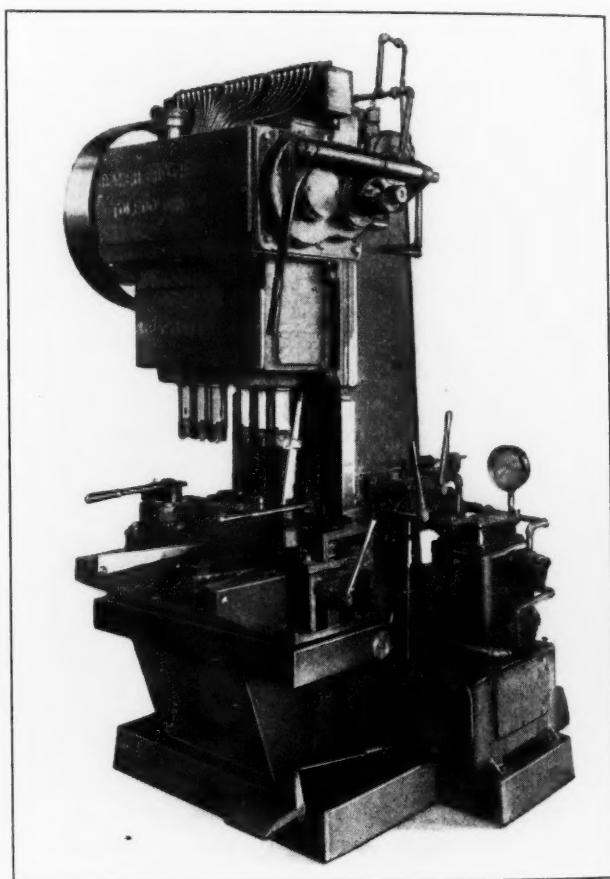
Baker Multiple-spindle Cylinder-boring Machine
